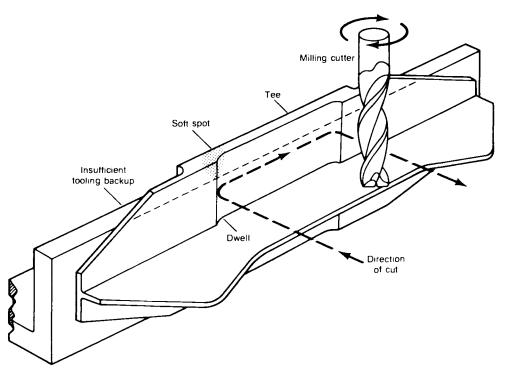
Schematic of the milling cutter path in machining the attachment tee shown in Fig. 9
